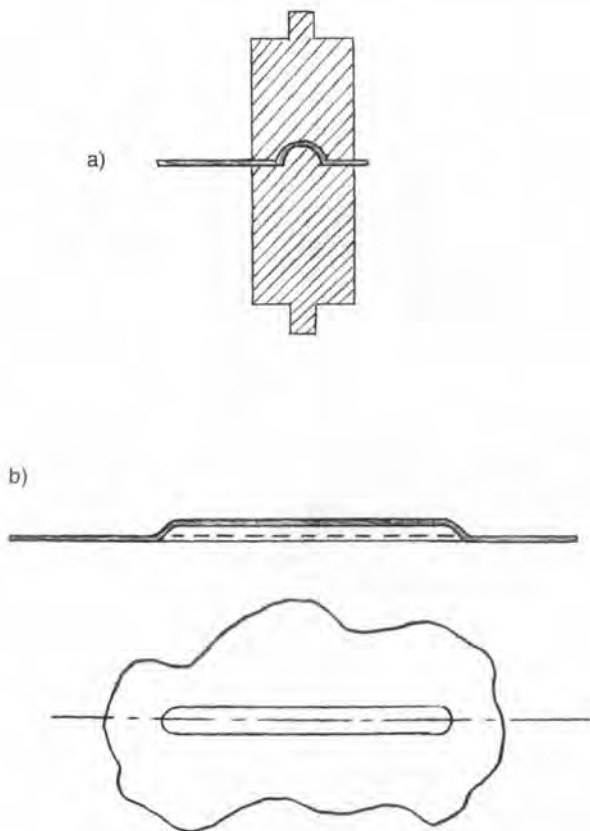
D9 A simple stiffening bead in a sheet metal part. The operation used to form the bead is very similar to that used in embossing.
